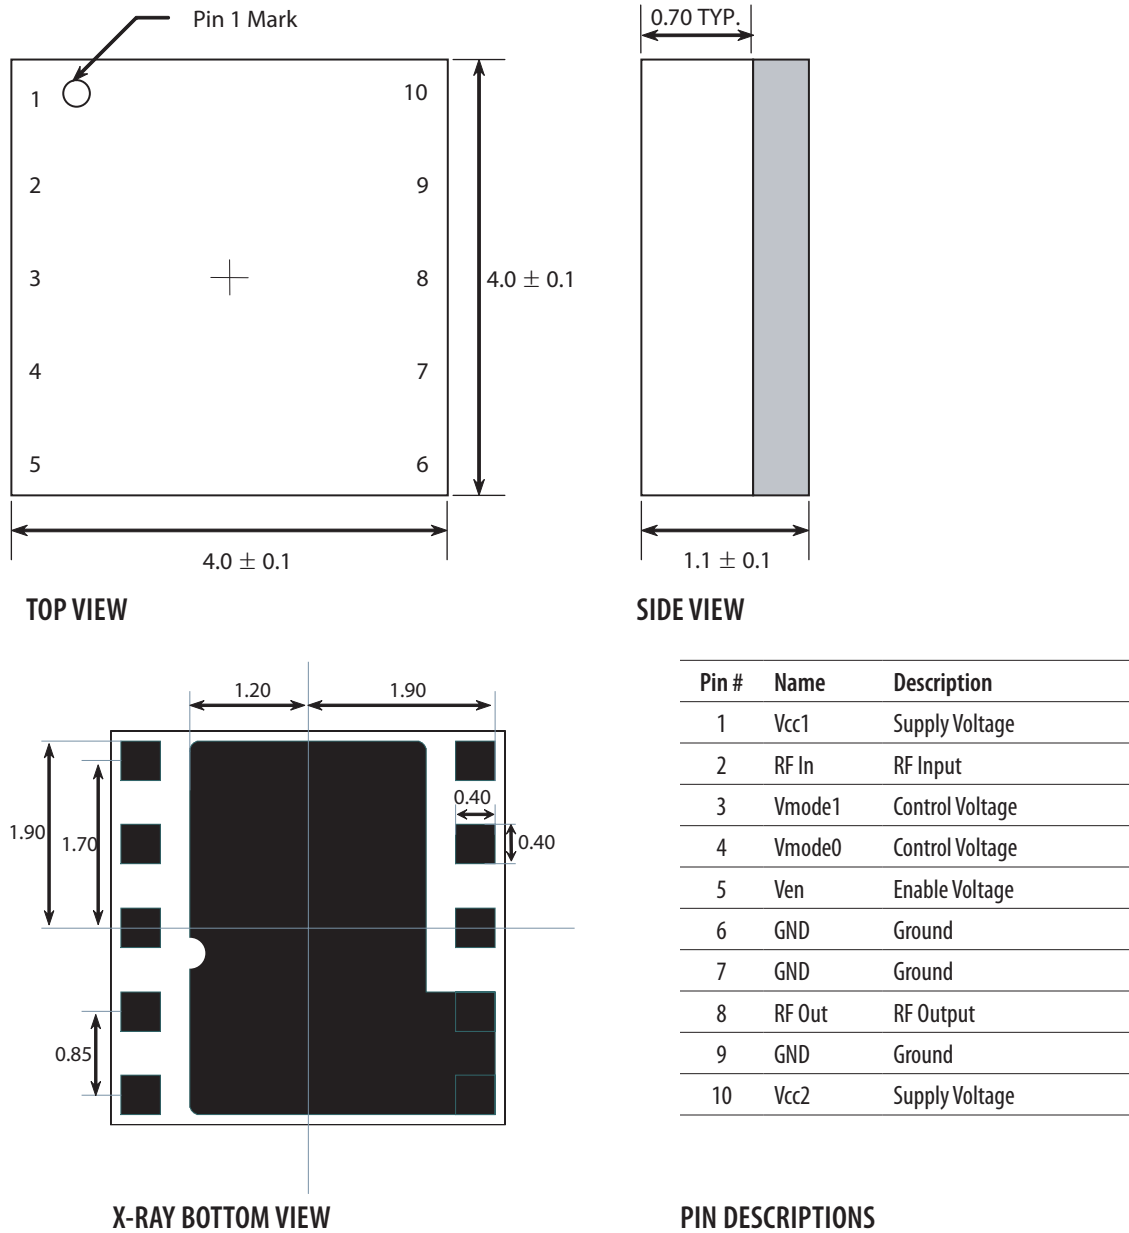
Package Dimensional Drawing and Pin Descriptions (All dimensions are in millimeters)
